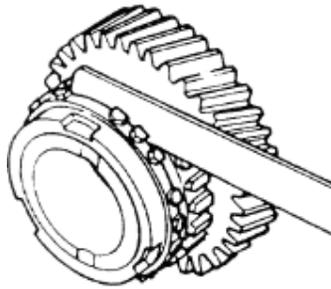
Inspection of joint clearance between synchronizer gear ring and hub
